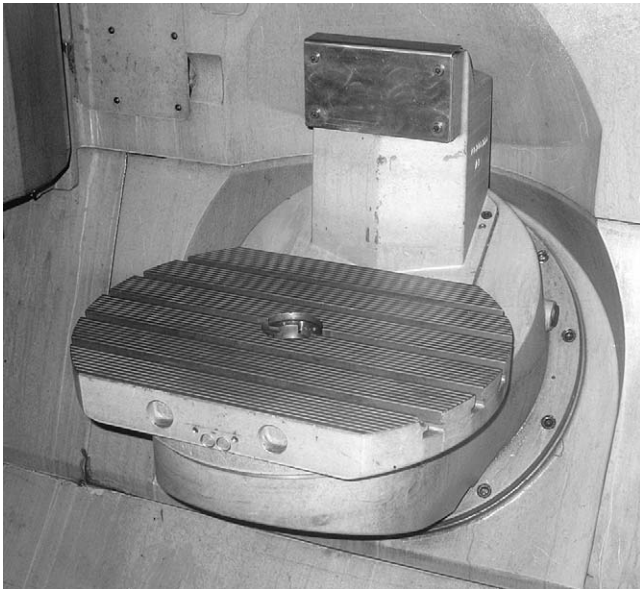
Non-orthogonal rotary axes in a milling machine.
